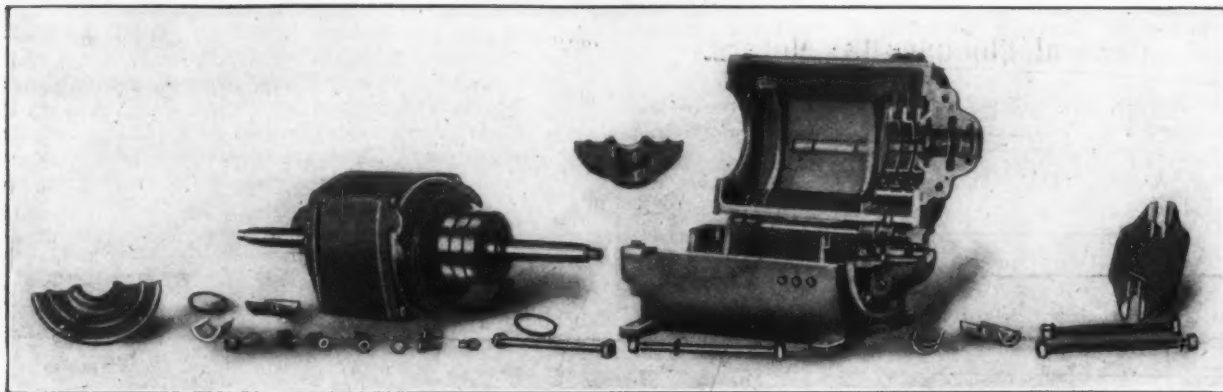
Modified Construction Adapting the Motor to Crane Use.
